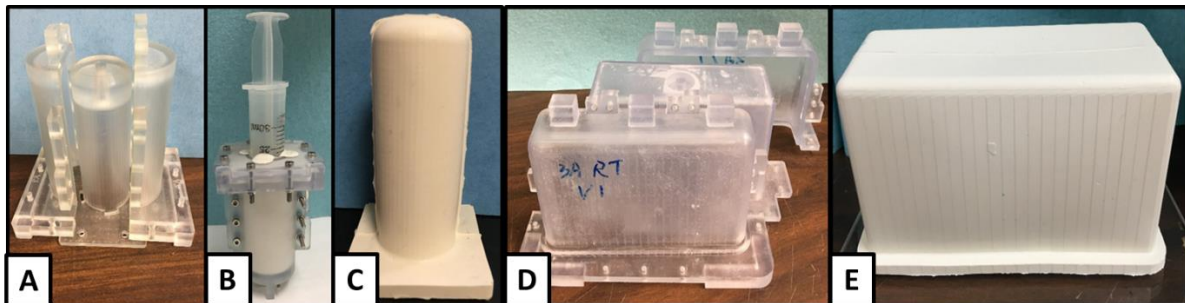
Injection molding process of actuators A) Three-part cylindrical actuator mold B) Cylindrical actuator being molded by injection via syringe C) Molded cylindrical actuator D) Three-part rectangular actuator mold E) Molded rectangular actuator
